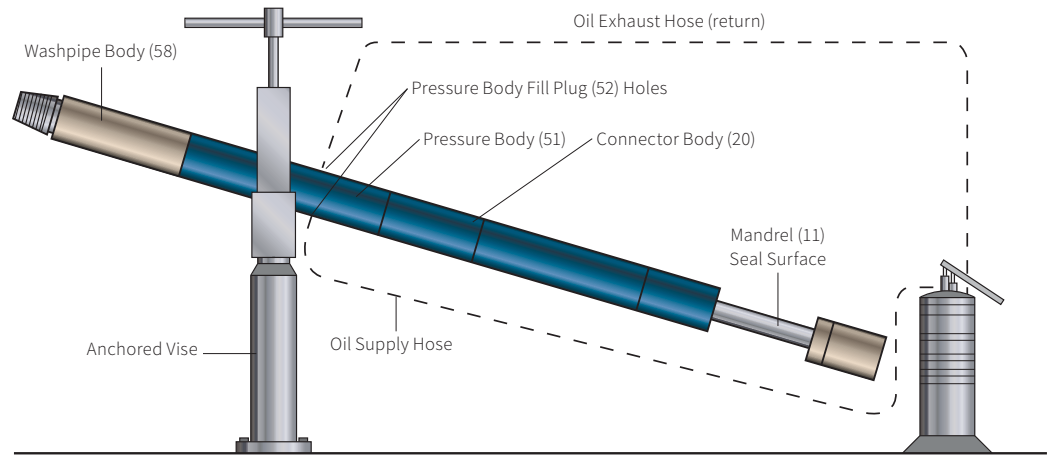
Initial Position of Super II Fishing Jar During Filling Operation
